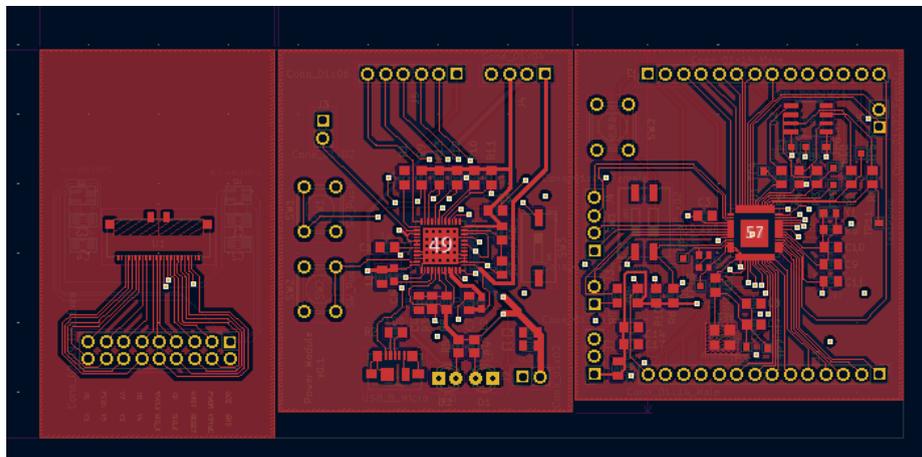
, PCB design of Rev A combined, To lower production costs, we applied V-cuts between the PCBs so we could separate them when they arrive.
